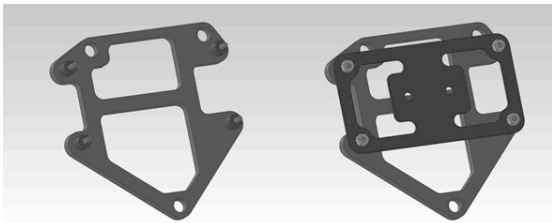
Left – Screw Damper Bolts onto the CAT Radio Bracket.
